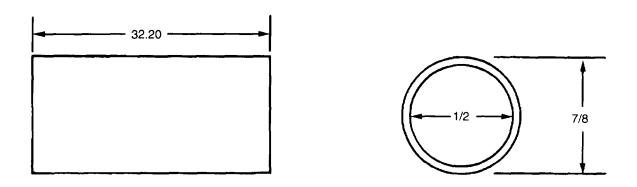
Hydraulic Brake Tube Assembly, Right (M101A3 and M116A3)
